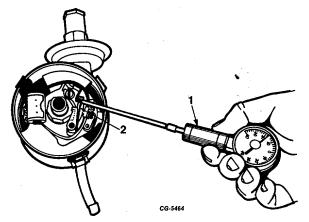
Checking Breaker Spring Tension 1. Tension Gauge 2. Breaker Arm
